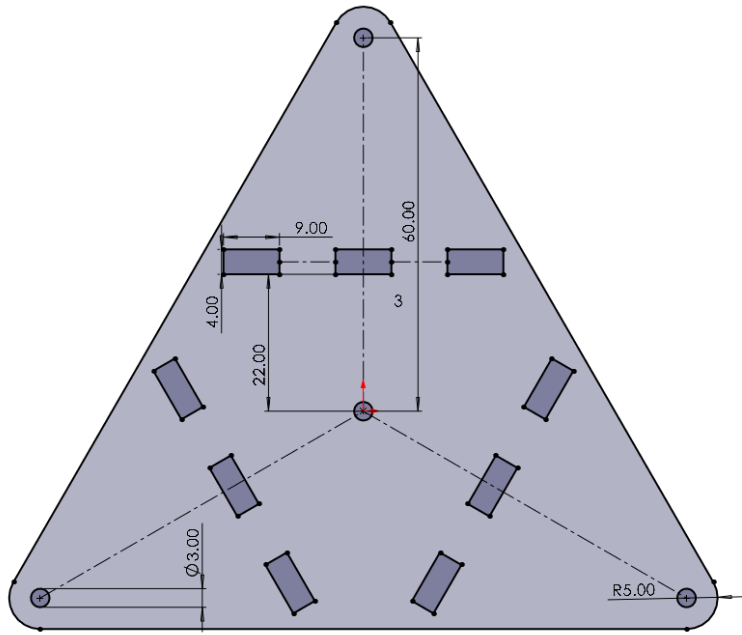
Dimensions of the PMMA board used in the third SMP design.
